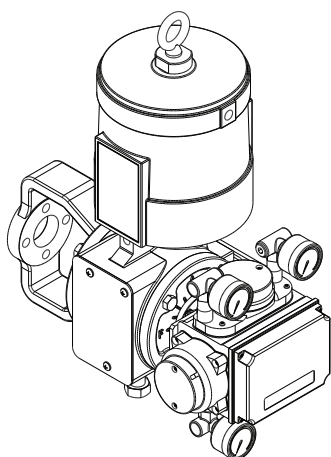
Assembly of Valtek HPP3500 Positioner in the Rotary Actuator
